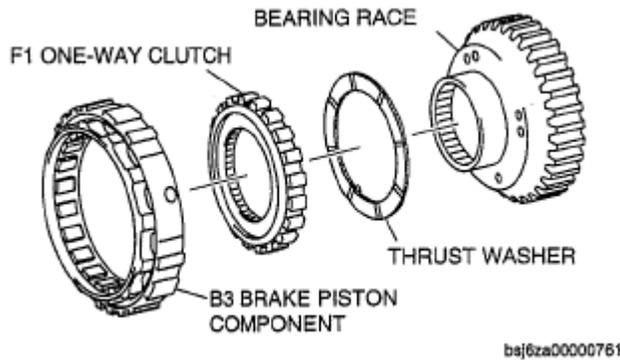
Identifying F1 One-Way Clutch, B3 Brake Piston Component, Bearing Race And Thrust Washer
